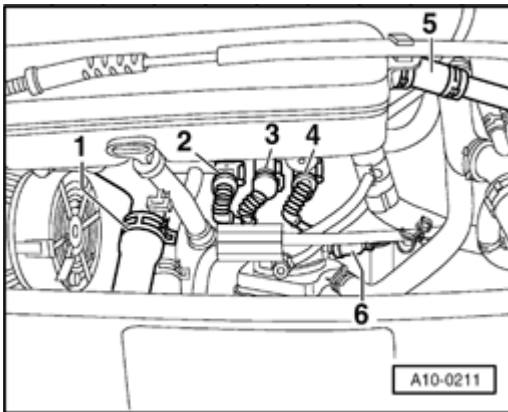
Identifying Coolant Hose, Knock Sensor (KS) I -G61-, Engine Speed Sensor (RPM) -G28-, Knock Sensor (KS) II -G66-, Oil Pressure Switch -F1- & Vacuum Pipe
